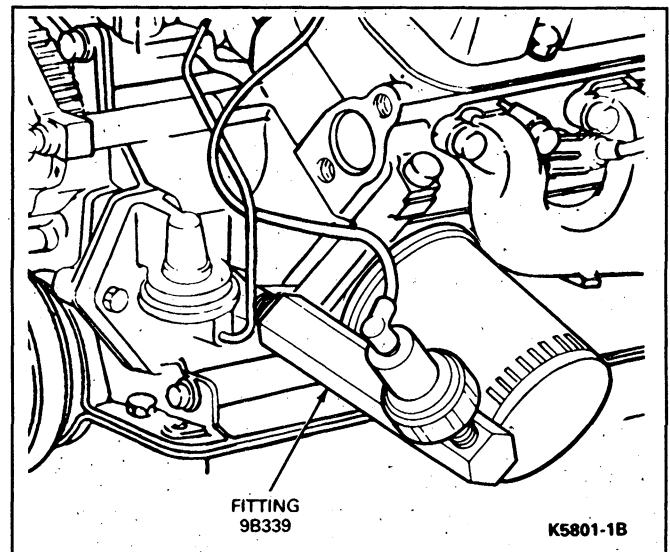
Typical Oil Pressure Sender Unit 8-Cylinder—5.0L (302 CID) and 5.8L (351 W) Engines Shown
